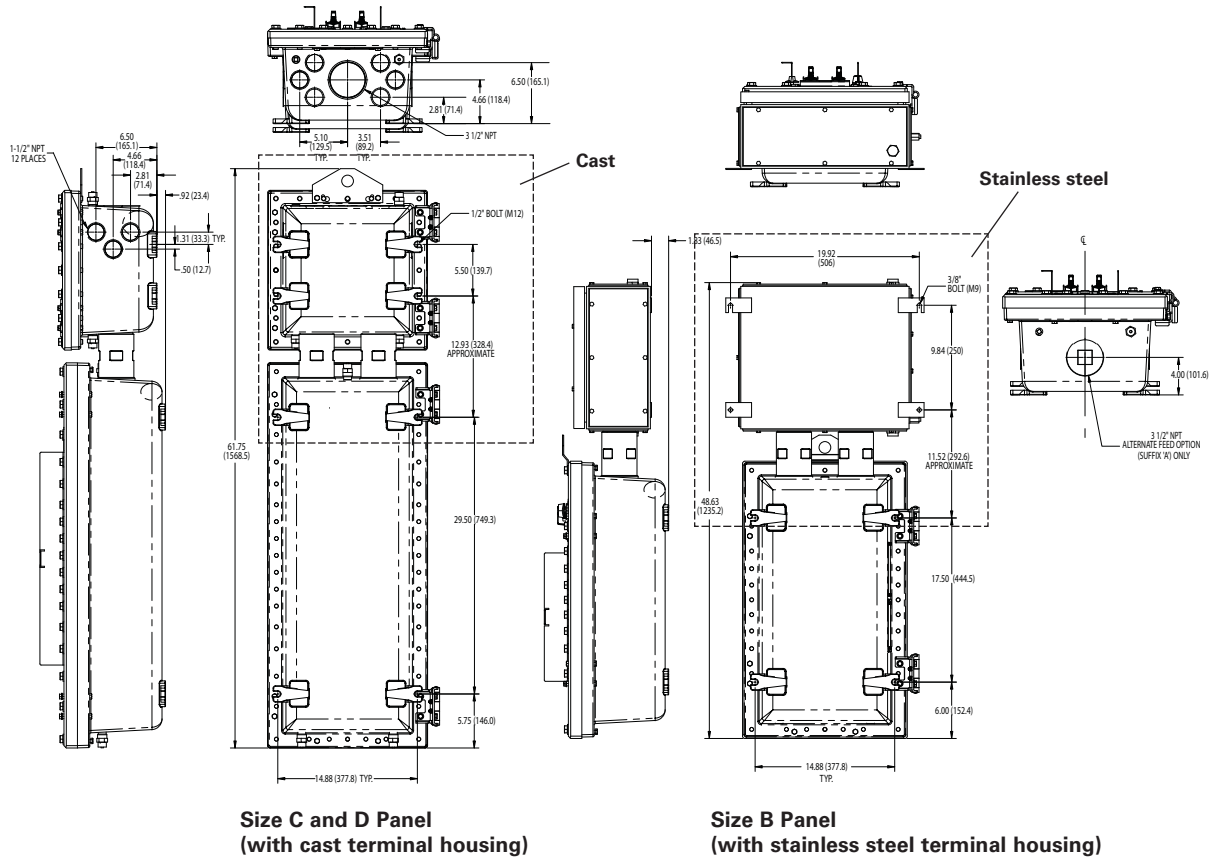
MOUNTING DIMENSIONS AND WEIGHTS
